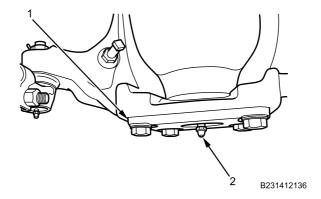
Lower Steering Knuckle Cap and Grease Fitting. Lower Shown; Upper Similar.
